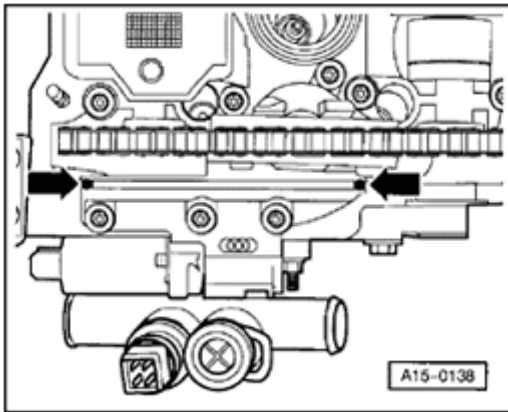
Sealing Points For Hydraulic Chain Tensioner/Cylinder Head
